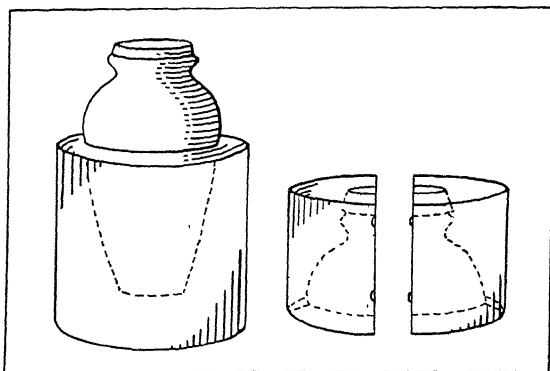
One method of making a three-part mold. This type of mold has the advantage of the parting line and the bottom of the mold not coming together which insures a better foot on the piece.
